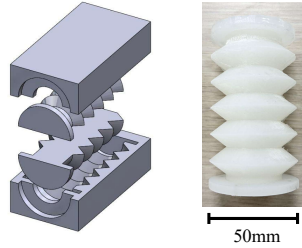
Left: Bellows mold. Right: Molded bellows.
